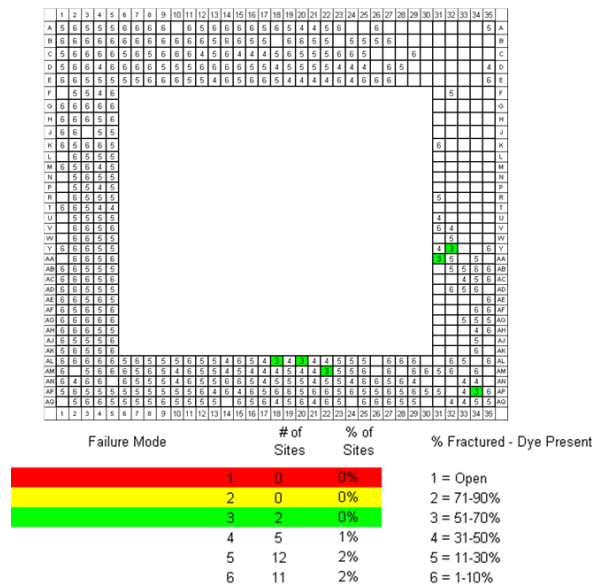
The Dye and Pry mapping for SBGA600 component showing the crack locations and percent fracture of the solder joints.
